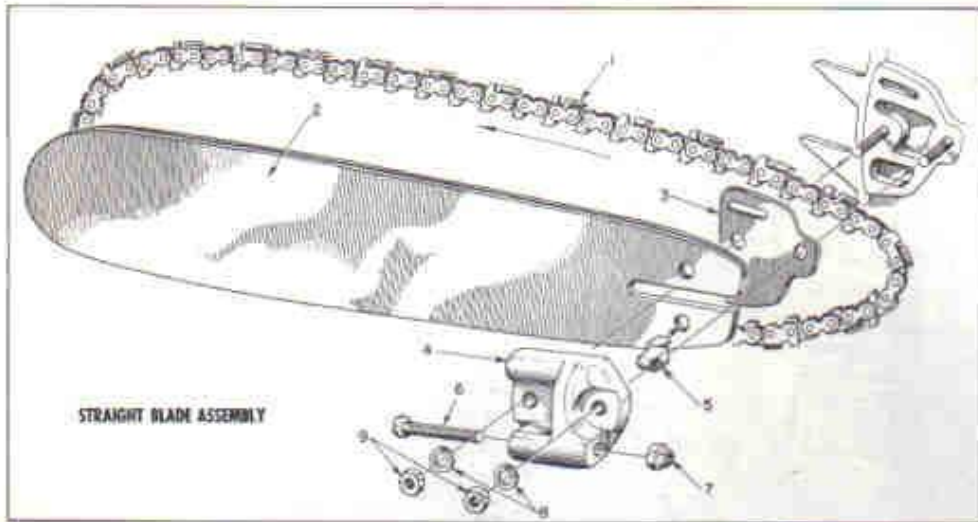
A — BARS AND CHAINS FOR SIX TOOTH SPROCKET-EQUIPPED SAWS
